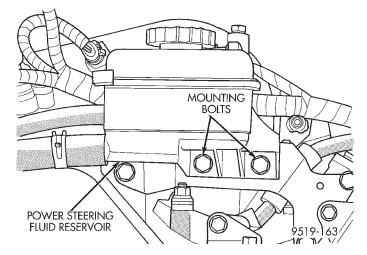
Power Steering Fluid Reservoir Mounting 2.5 Liter Engine
